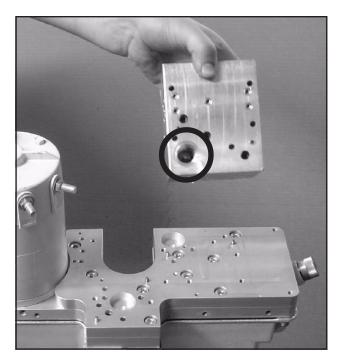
Install P.O. Pilot Spool Assembly with new inner and outer o-rings to the Super V Valve Block Assembly.
